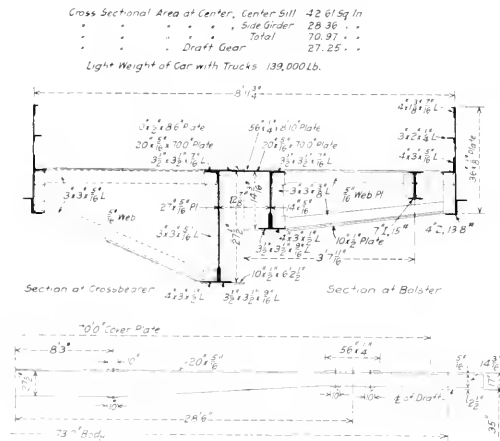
Underframe Designed to Carry the Weight on the Center Sills, with a Sustaining Side Girder
